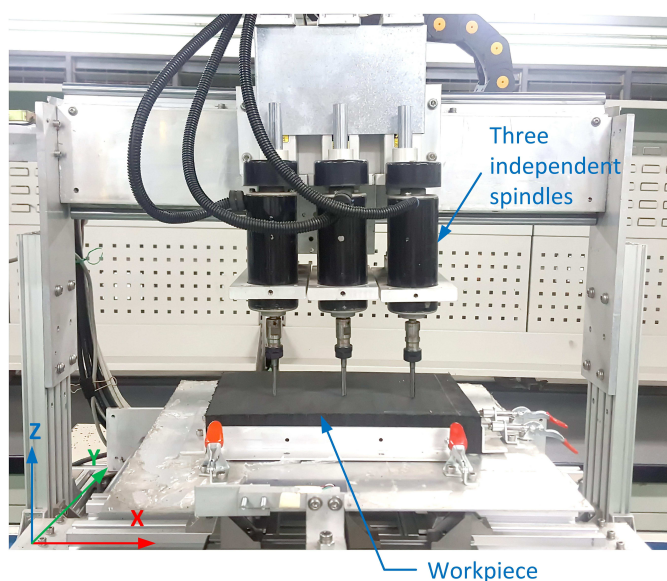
The first prototype CMI cutting machine with three independent spindles
